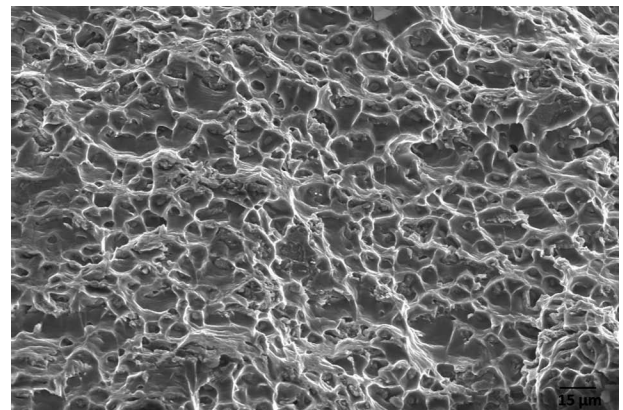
Higher magnified image of the fracture surface shown in Fig. 121. The fracture surface suggests ductile failure
